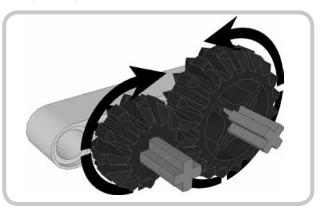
When two gears mesh, motion can transfer between the gears and, subsequently, their axles.
